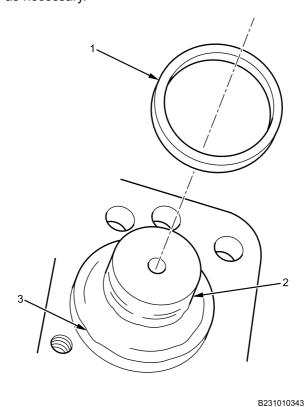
Inspecting Upper and Lower Steering Knuckle Caps.
